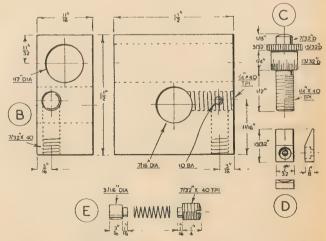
B—the spindle bracket; C—the micrometer feed screw; D—the index plate; E—the pad-piece components
